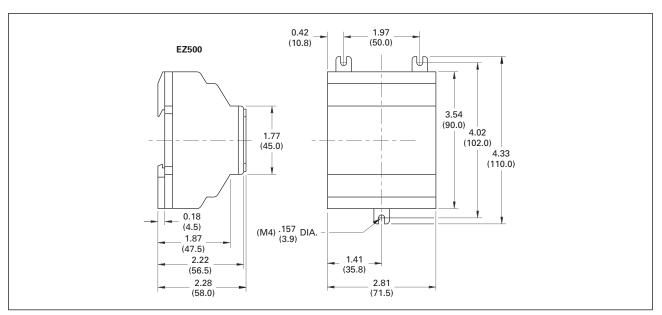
EZ500 Series Dimensions in Inches (mm), Drawing Number MD05013001E
